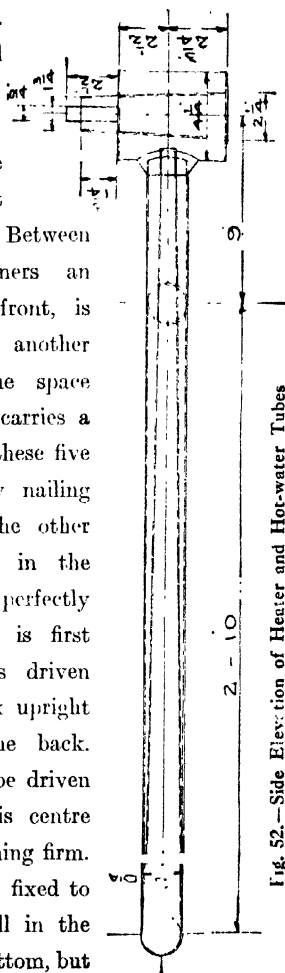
Side Elevation of Heater and Hot-water Tubes
